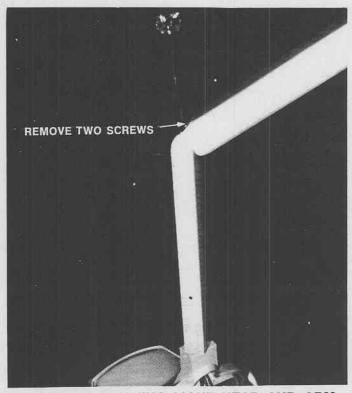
REMOVING LIGHT HEAD AND ARM
